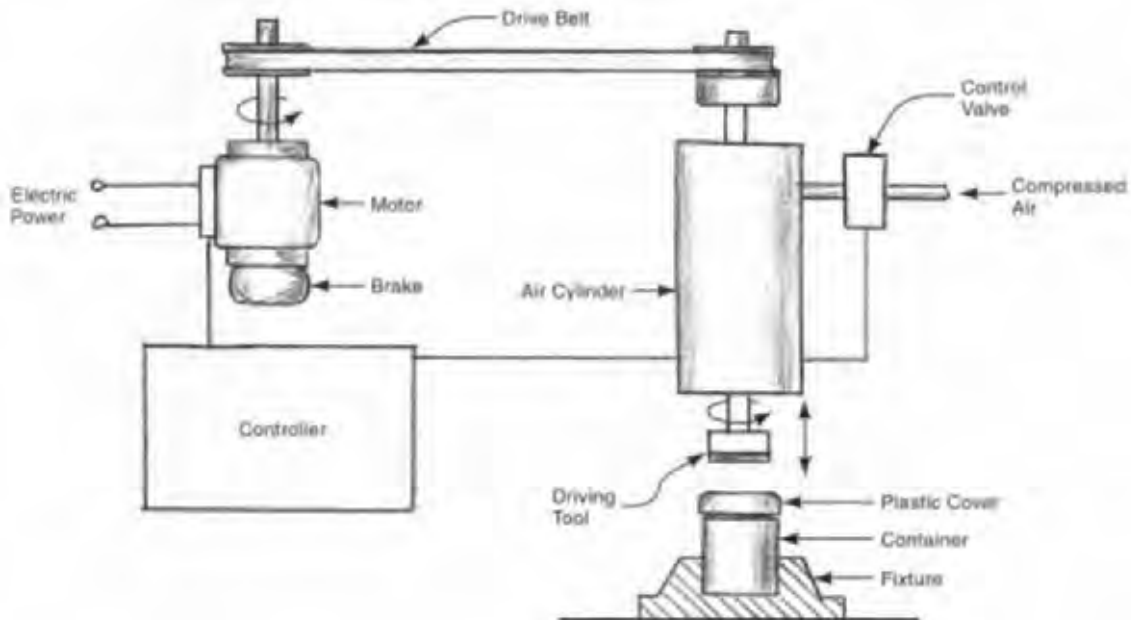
L1 Arrangement for spin welding. The driving tool descends and rotates the plastic cover against the plastic workpiece. Frictional heat fuses the two together. Speed of rotation, timing, and pressure are controlled automatically.
